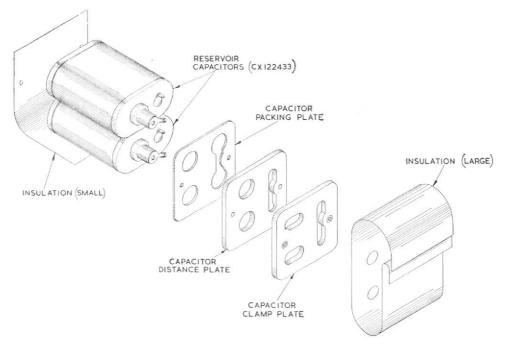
Assembly of reservoir capacitor CX122433 components.
